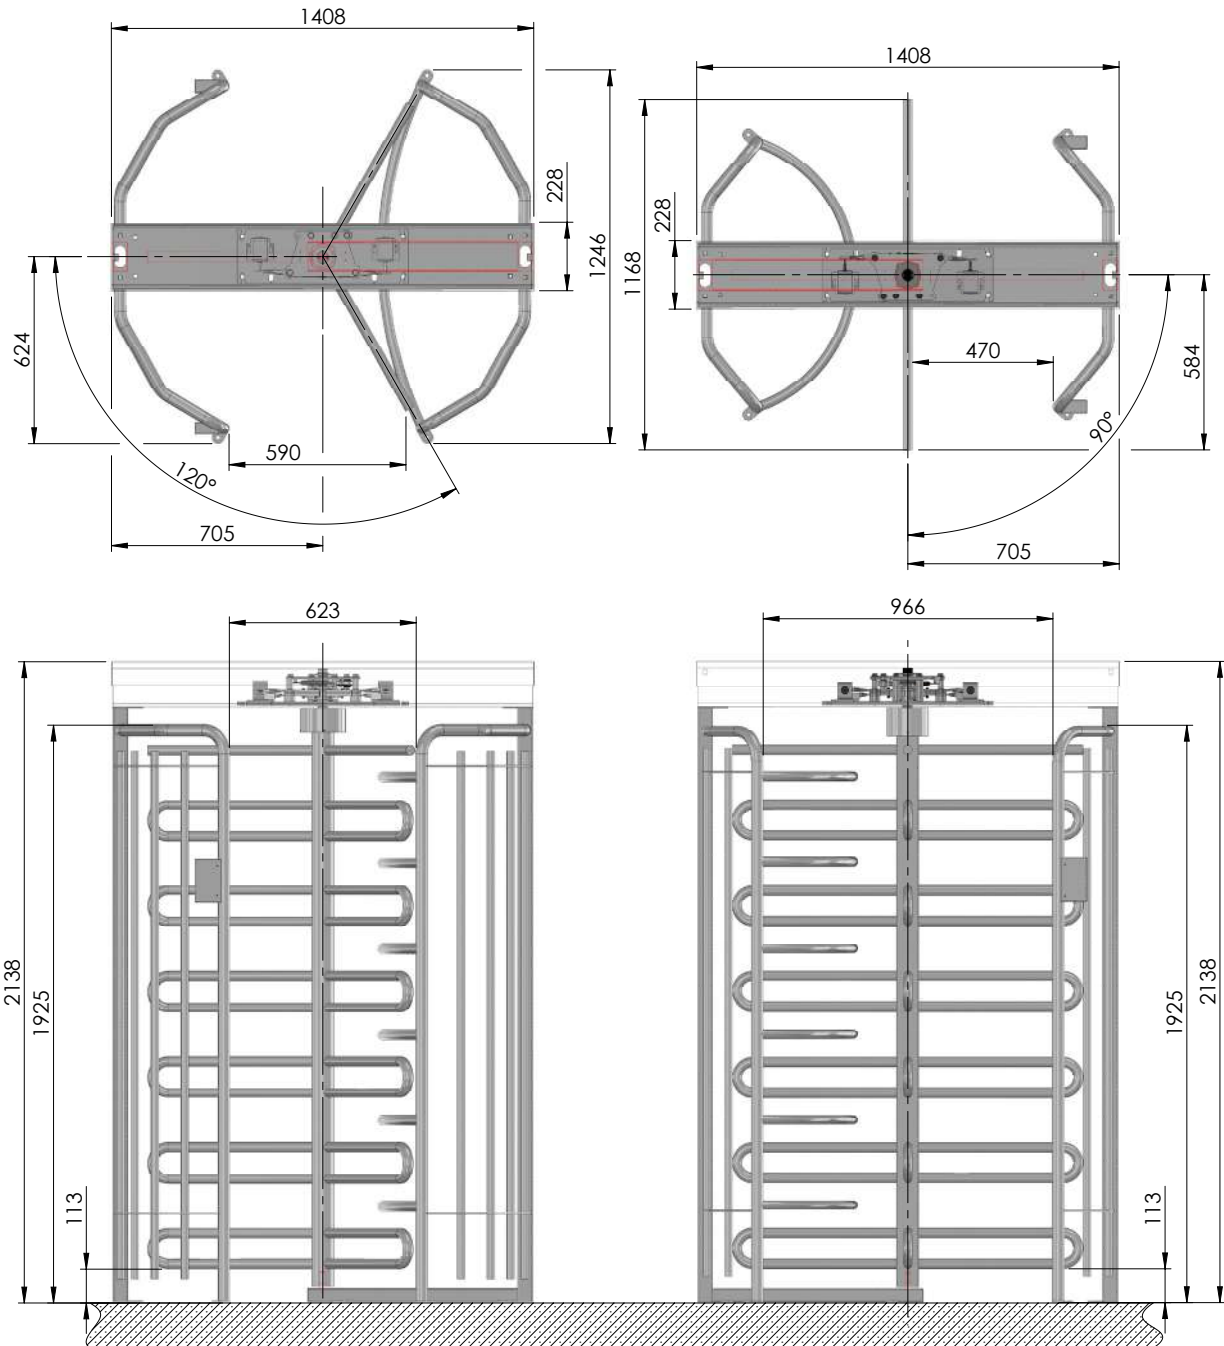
Typical Layout Details RotaTech Full Height 90/120
